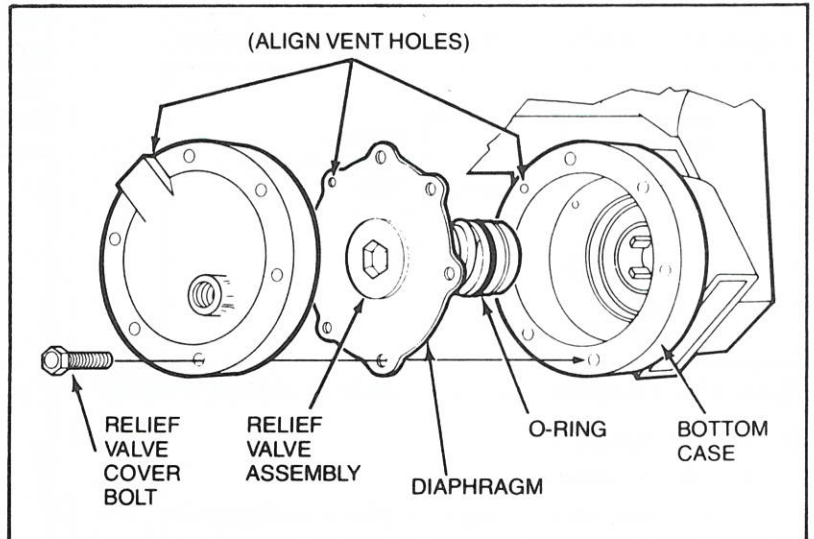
B. RELIEF VALVE ASSEMBLY FRP-II
